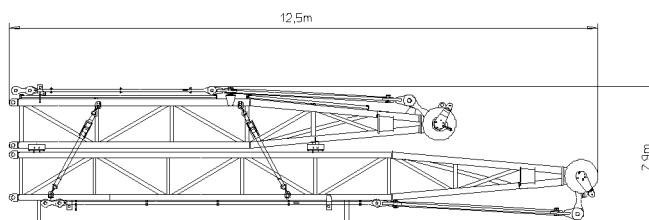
WA-frame 1 and WA-frame 2 end sections
